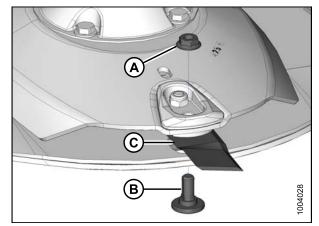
Nut, Shoulder Bolt, and Cutter Blade
